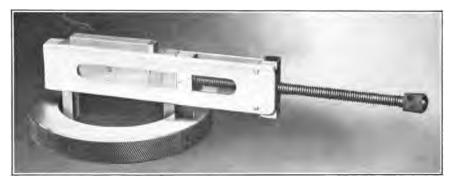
HOLDER AND ITS USE IN GAGING RINGS
